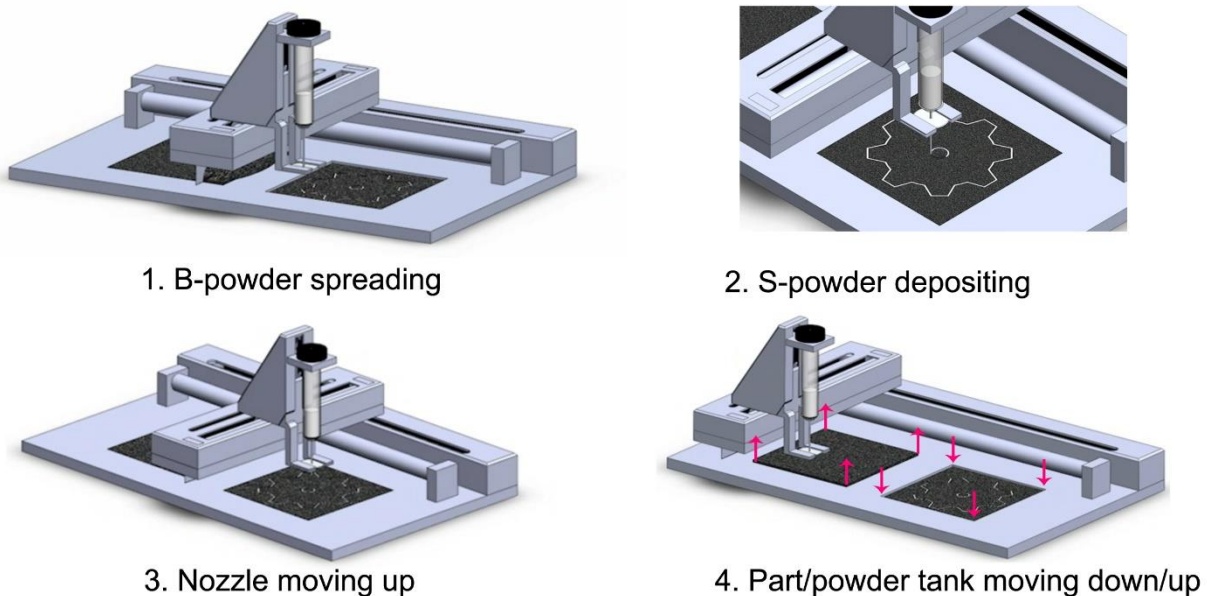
Printing process of SSS. 1. B-powder spread; 2. S-powder deposition; 3. Nozzle raised; 4. Part tank lowered, powder tank raised
